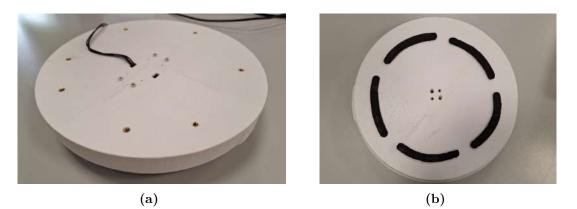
3D printed base: (a) Top view, (b) Bottom view.
